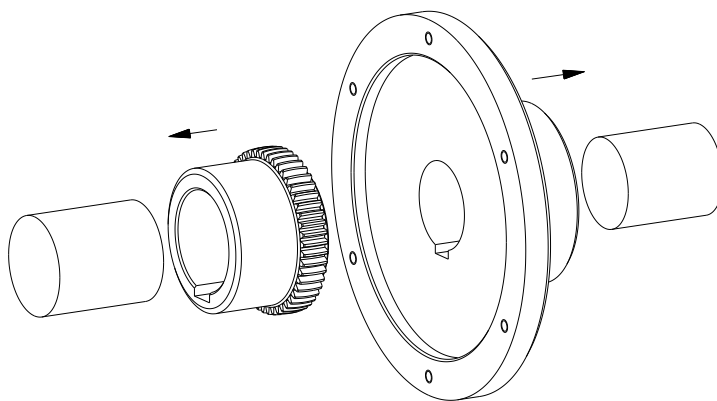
Assembly of the hub and the flange hub resp. coupling flange (example: type HEW1)
